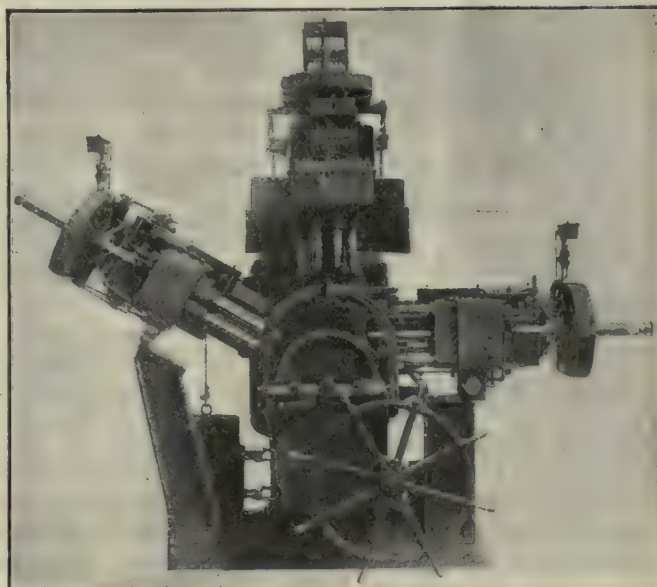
THREE-WAY MACHINE WITH INCLINED SPINDLES
